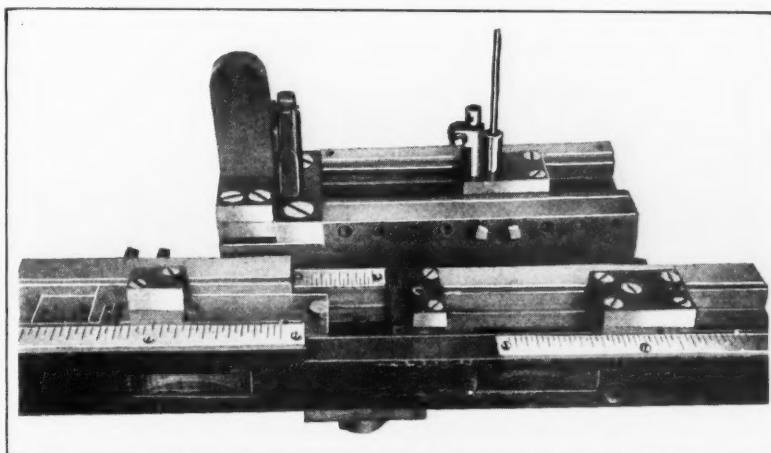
Punch and Die Members of Adjustable Piercing, Forming, and Cutting-off Die
